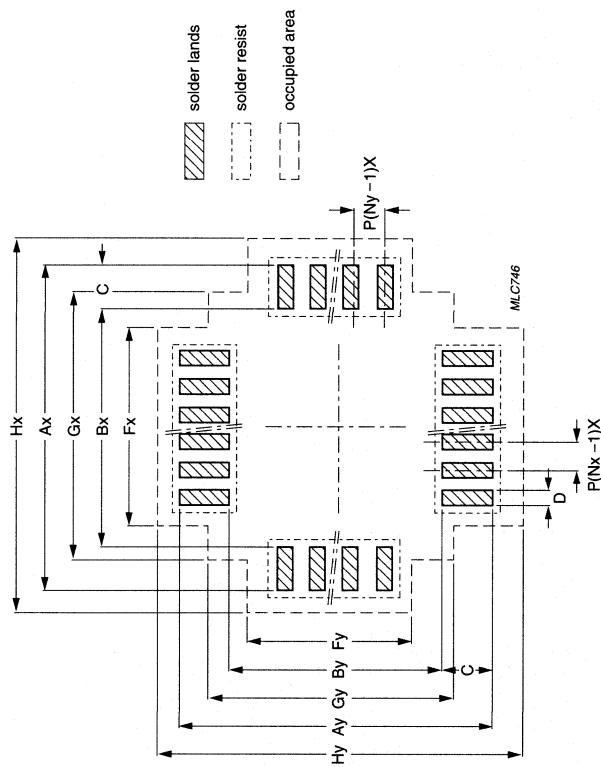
PC board footprint for mounting QFP, SQFP, LQFP & TQFP packages (reflow soldering).
